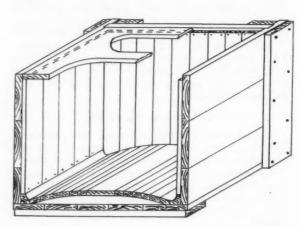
Cutaway section of core box showing inner lining. This lining has two purposes; it provides a seat for the loose piece, and it furnishes a surface on which a sweep will ride to establish lower level of piece.
